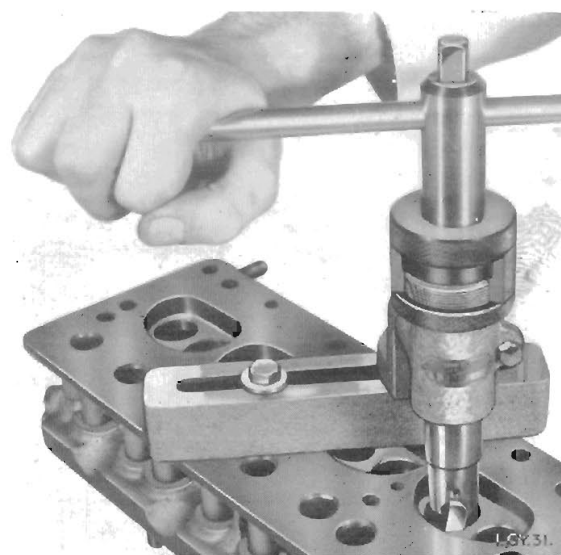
Boring cylinder head for valve seat insert — using tool No. MFS6056-1
